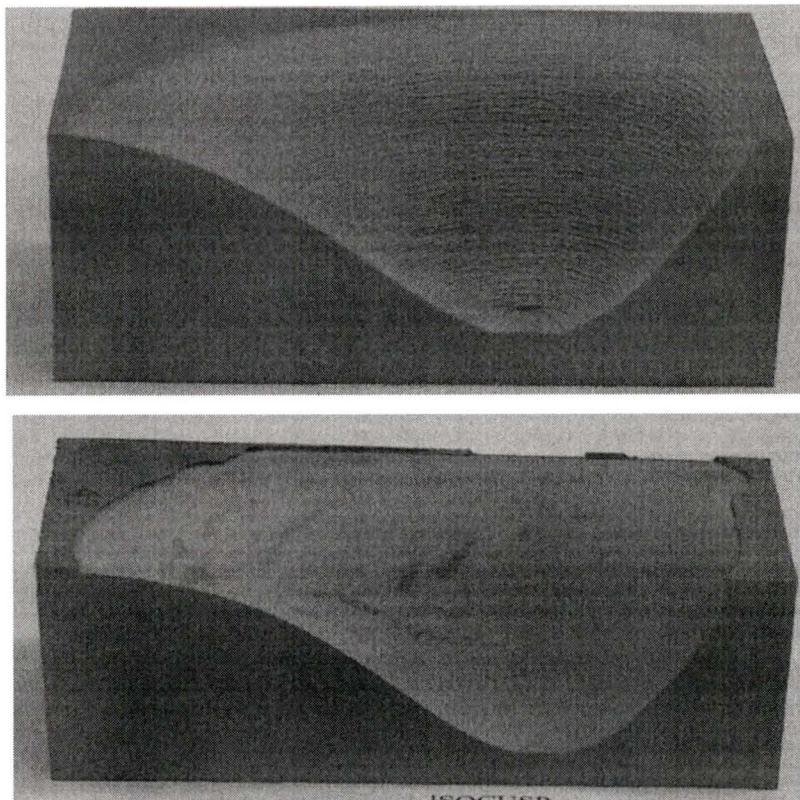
Machined Freeform Concave Surfaces (Top to Bottom): SDIC, Isocusp
